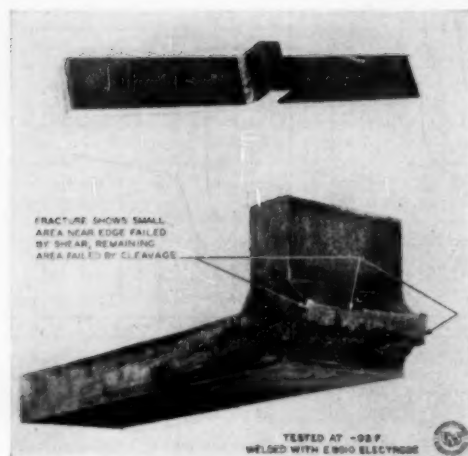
TYPICAL TEE-BEND SPECIMEN OF 1-IN. QUENCHED-AND-TEMPERED T-1 STEEL, BEFORE AND AFTER TESTING (Welded with E6010 electrode; tested at -98°F .)
